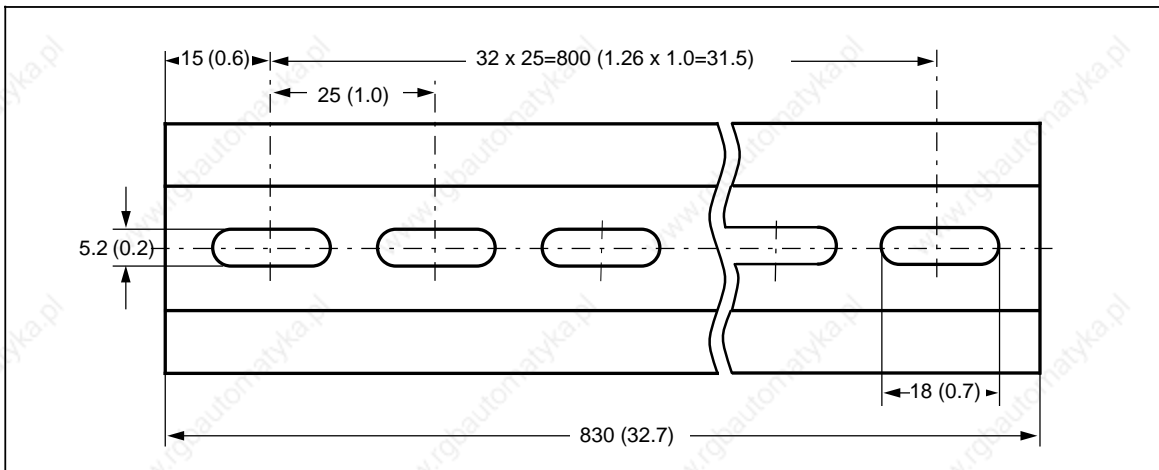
Dimension Drawing of the 830-mm (32.7-in.) Standard Mounting Rail
